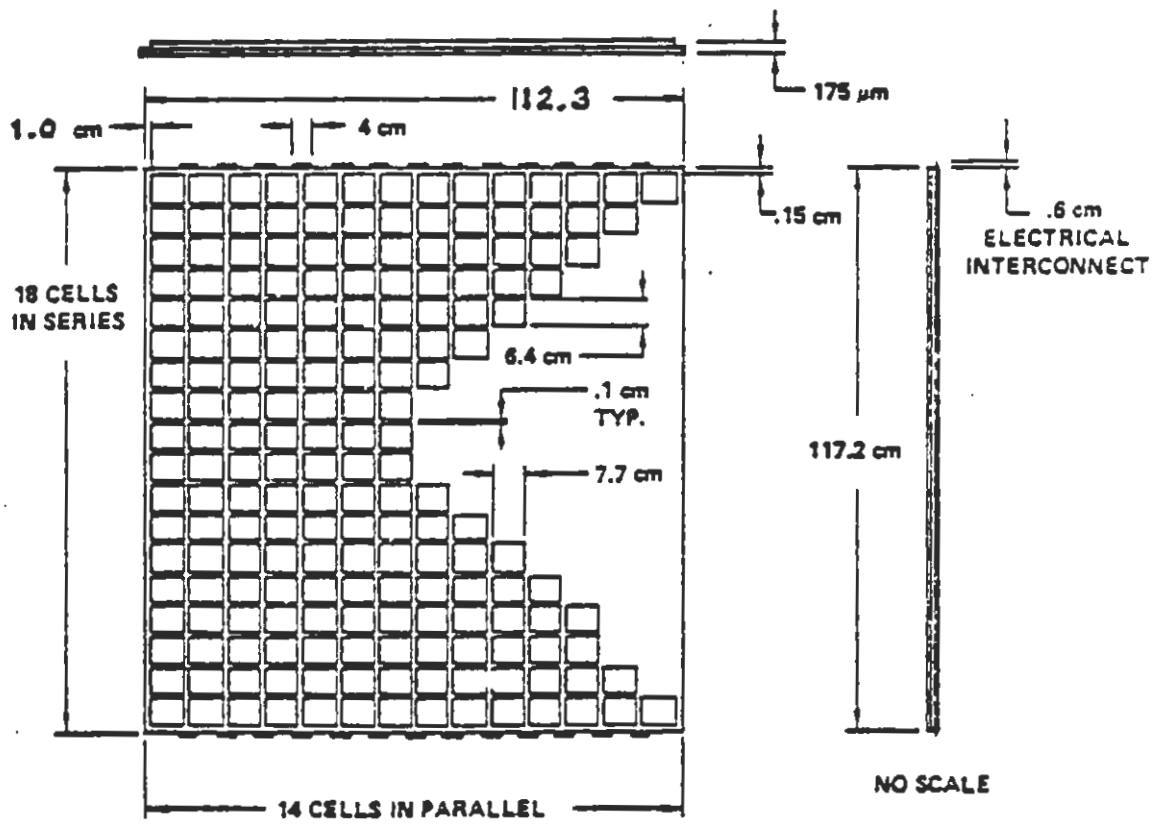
, PANEL DIMENSIONS, TOP AND SIDE VIEWS
